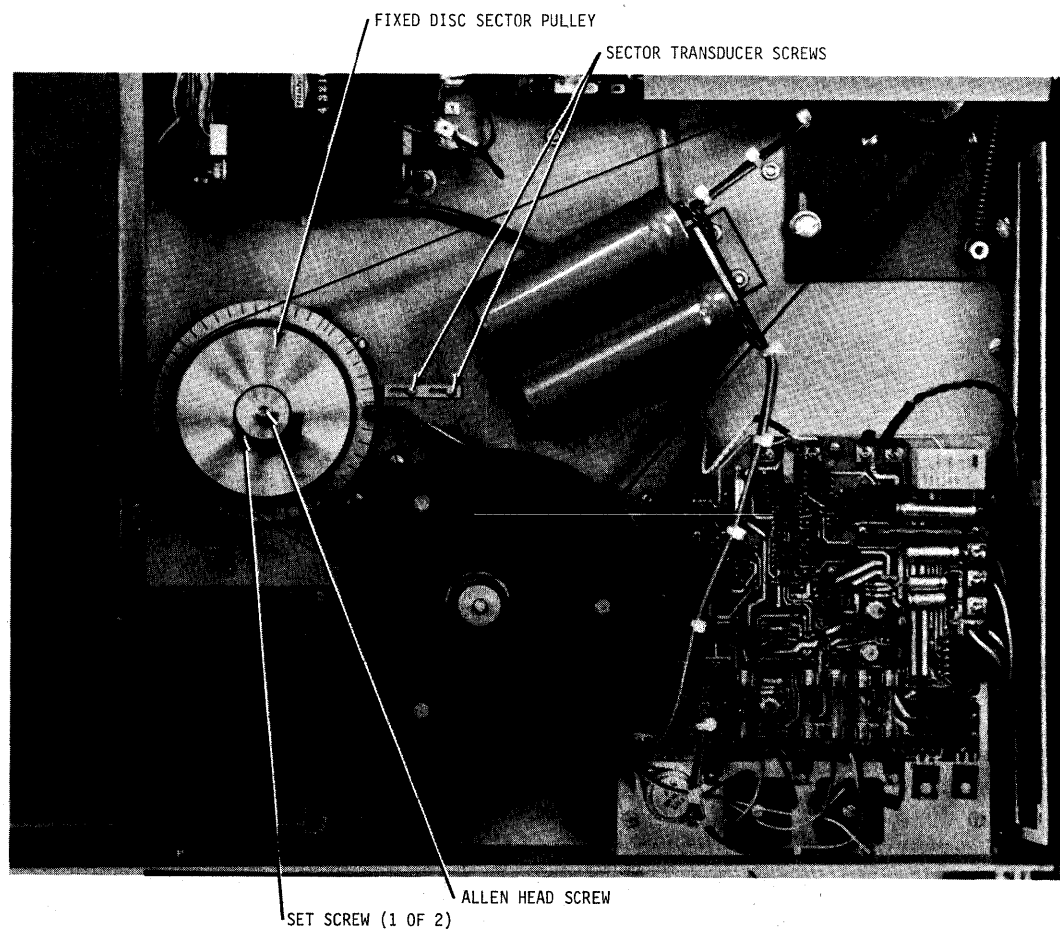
Fixed Disc Removal; Fixed Disc Sector Transducer and Sector Pulley
